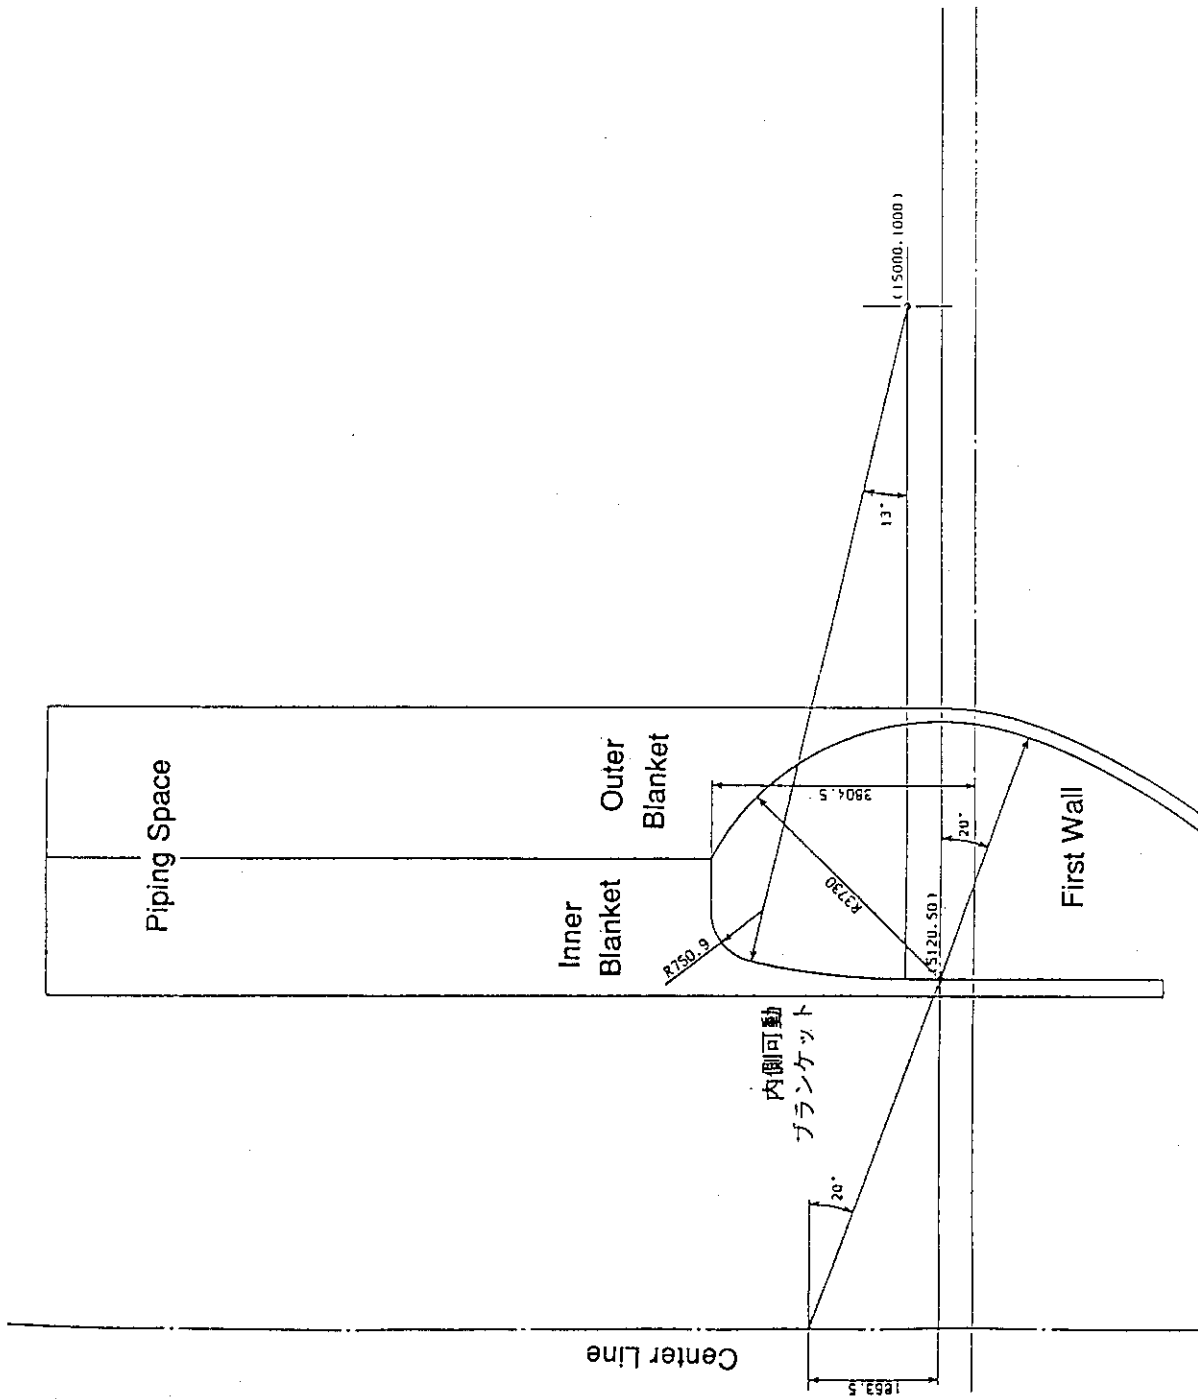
Dimension of first wall and movable blankets.
